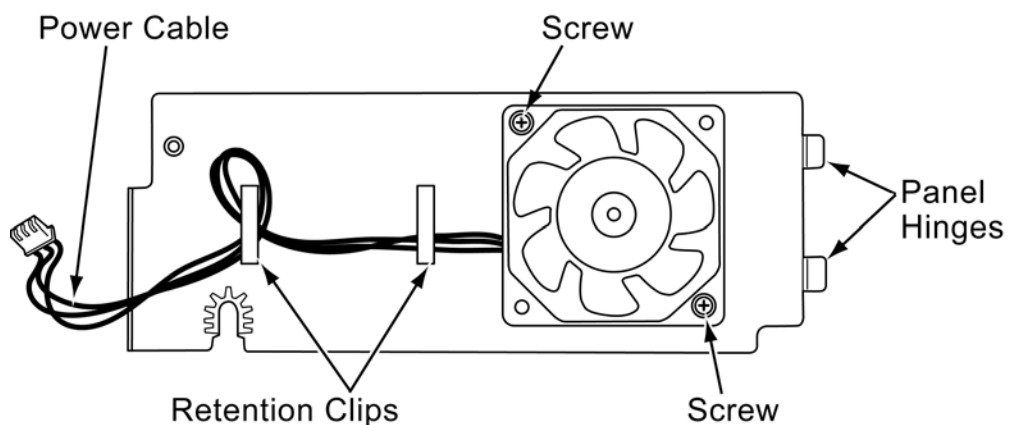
Chassis Access Panel Removed (CHS1U-AU Chassis)
